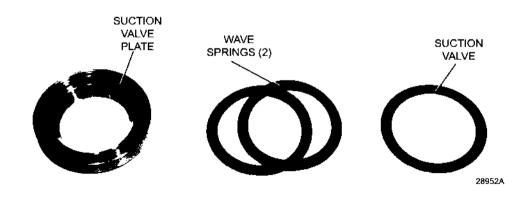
WAVE SUCTION VALVE ASSEMBLY 664-44291-000 (1998 - CURRENT)
